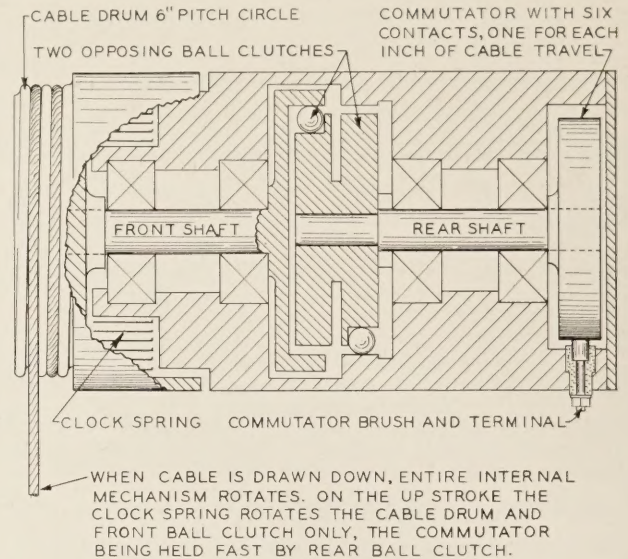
SCHEMATIC SECTION OF INTEGRATOR ELEMENTS.
